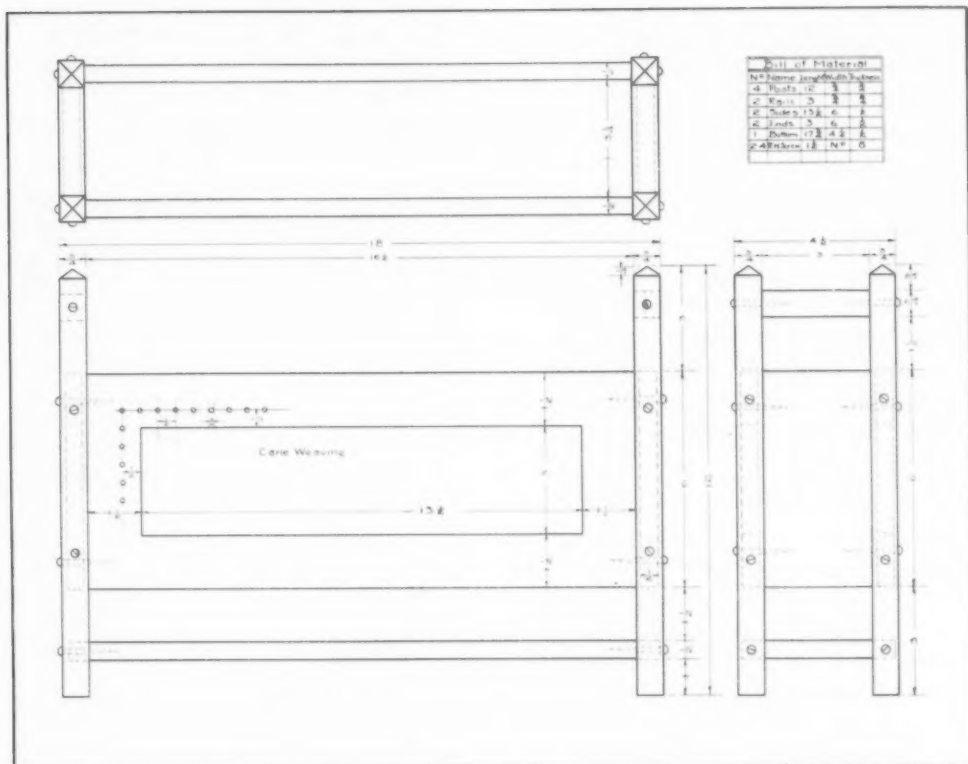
WORKING DRAWING GIVING DETAILED DIRECTIONS FOR BUILDING THE MAGAZINE RACK SHOWN ON THE PAGE OPPOSITE
